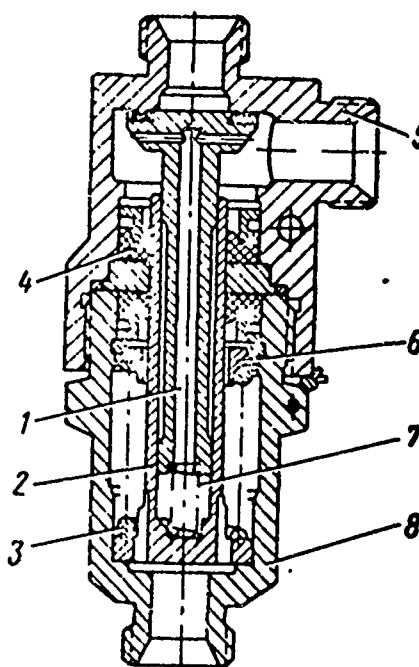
Propellant valve: 1 - valve; 2 - rod; 3 - spring; 4 - seal ring; 5 - housing; 6 - spring detent; 7 - small spring; 8 - bushing.
